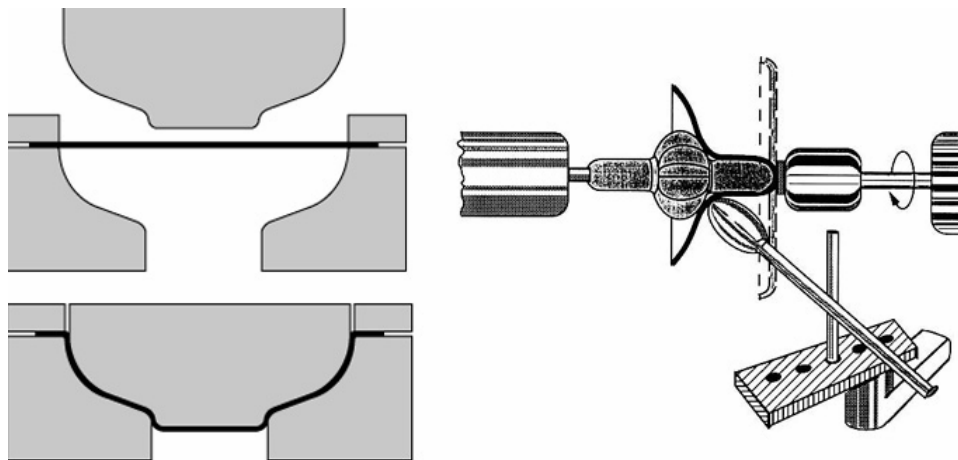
Principle arrangement of deep drawing (left) and spinning (right) technology (courtesy of H. Padamsee and E. Palmieri).
